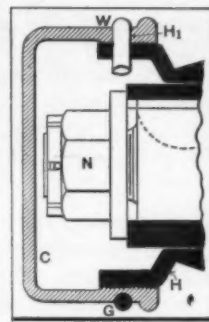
Section of the hub of a wheel showing how to lock the hub cap so that it will not drift off
